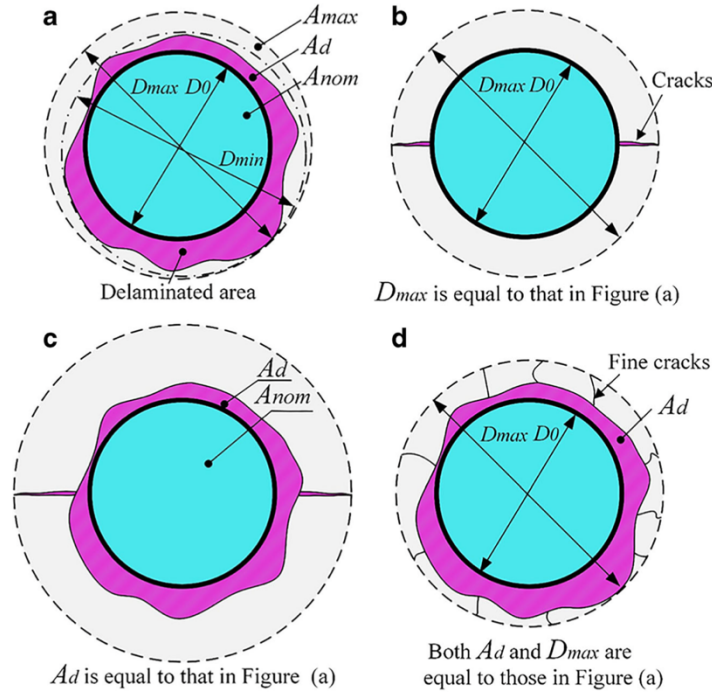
Drilling induced hole damage of CFRP: a) uniform, b) cracks, c) uniform with cracks, d) uniform with fine cracks [17]
